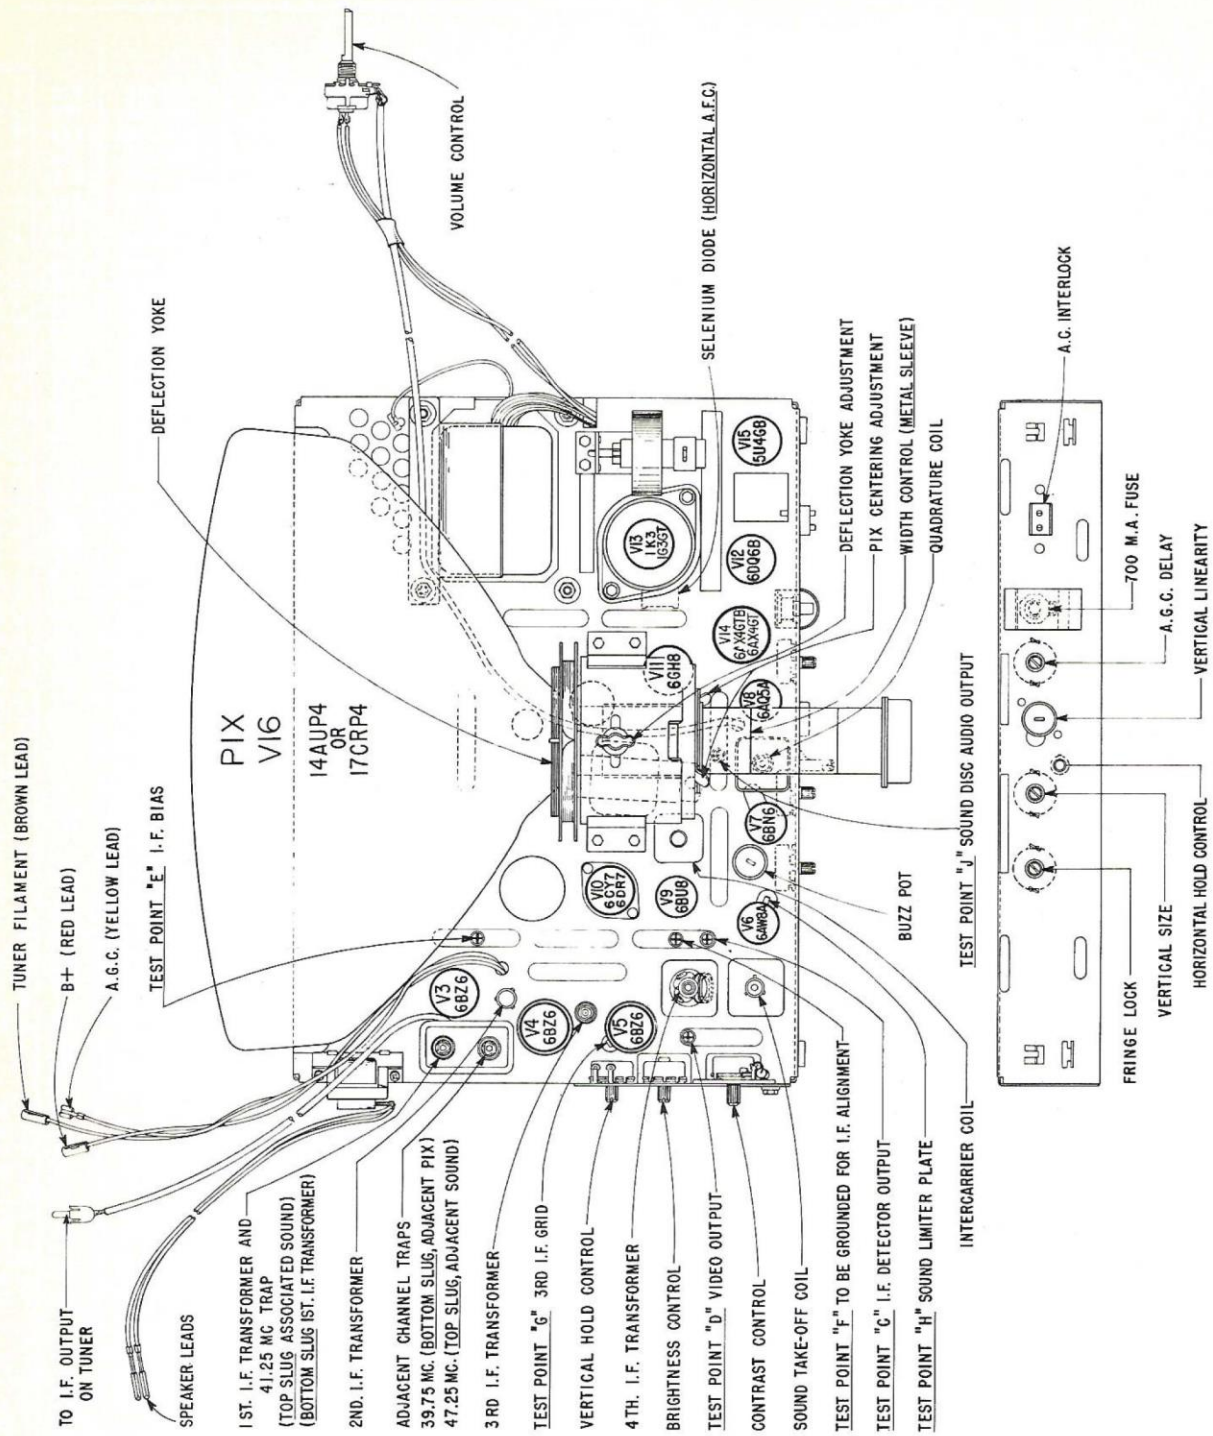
Tube and Trimmer Layout 16E20 Chassis
